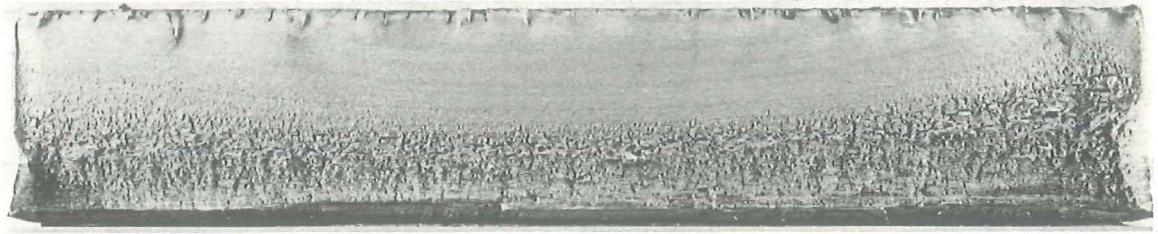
Crack front markings generated during testing of a 40mm specimen.
